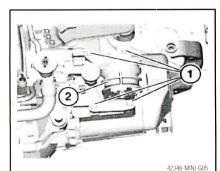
Showing right transmission bracket—Cooper Coupe models
